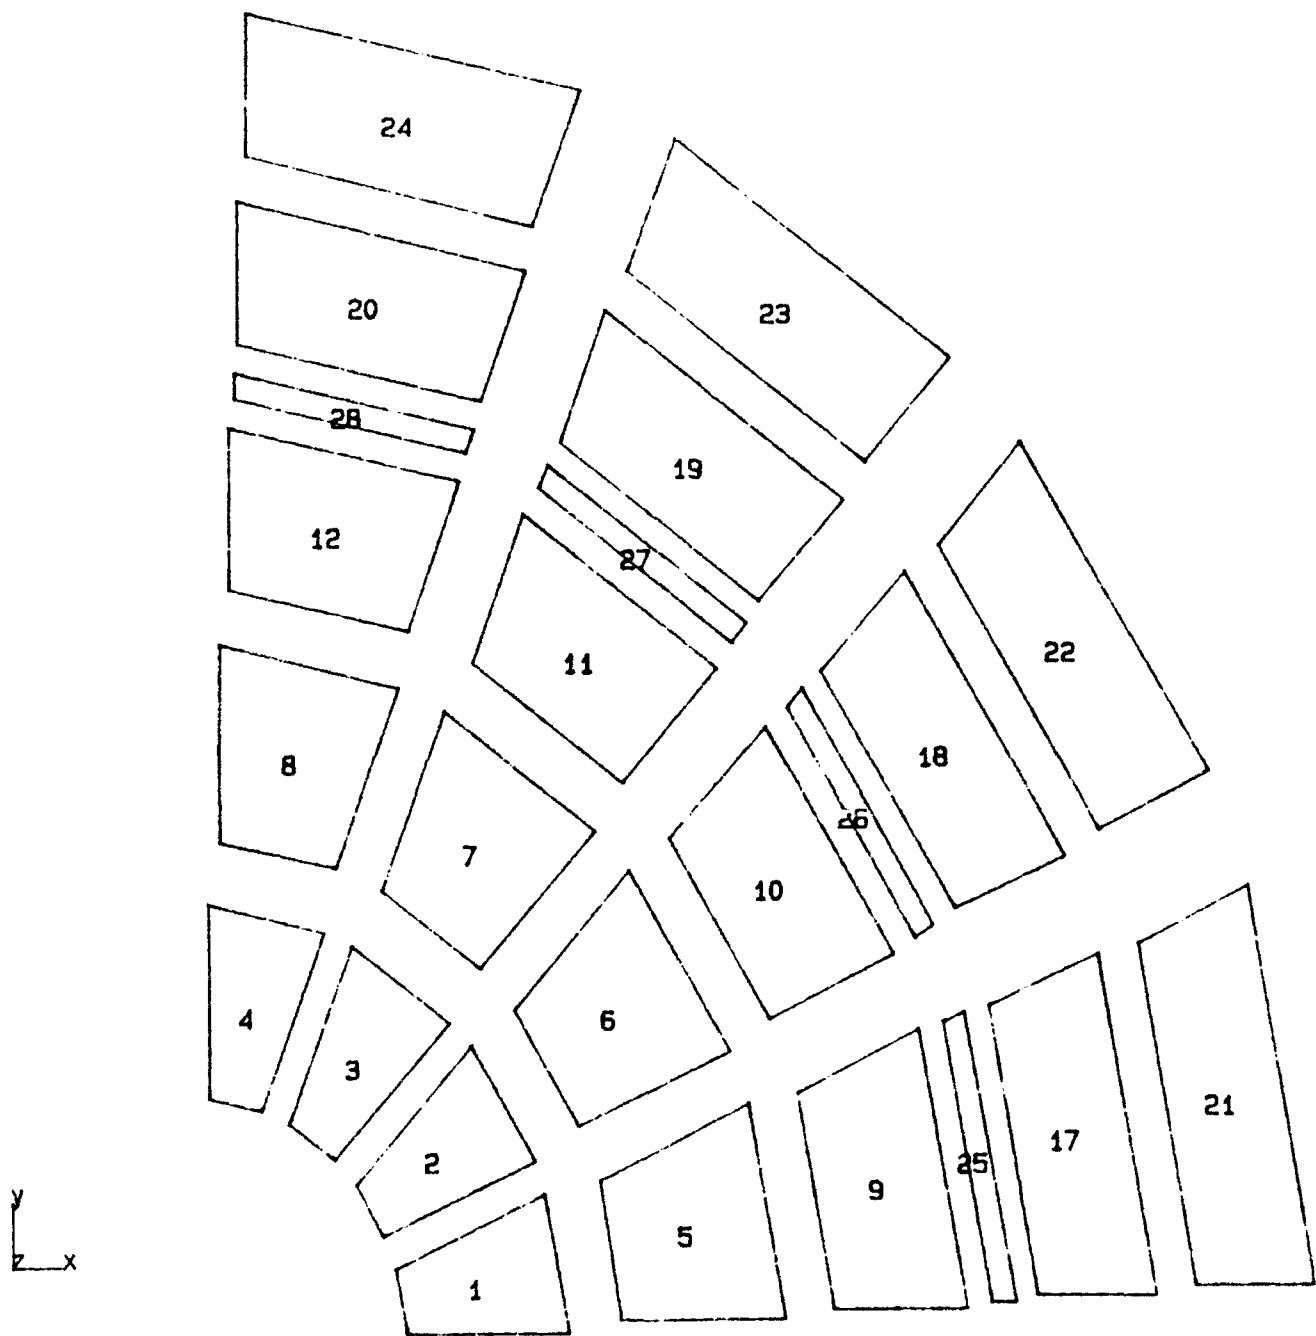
Cryobearing FEA Model (Exploded) - Plan View
